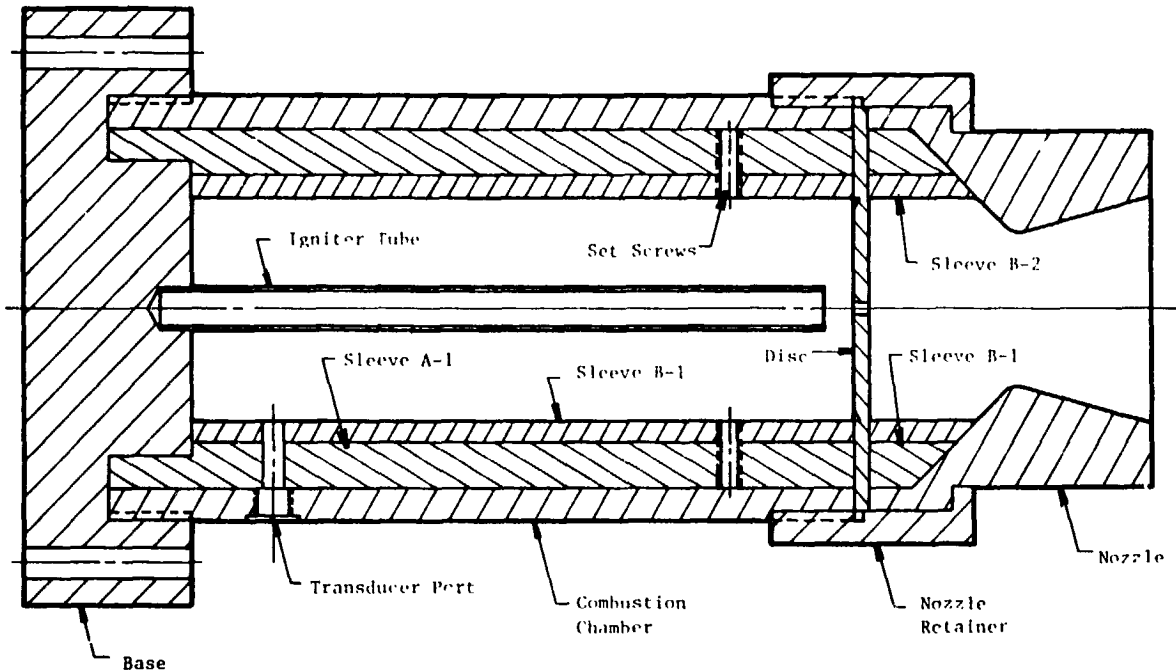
ASSEMBLY DRAWING RECOILLESS RIFLE CHAMBER TEST FIXTURE
